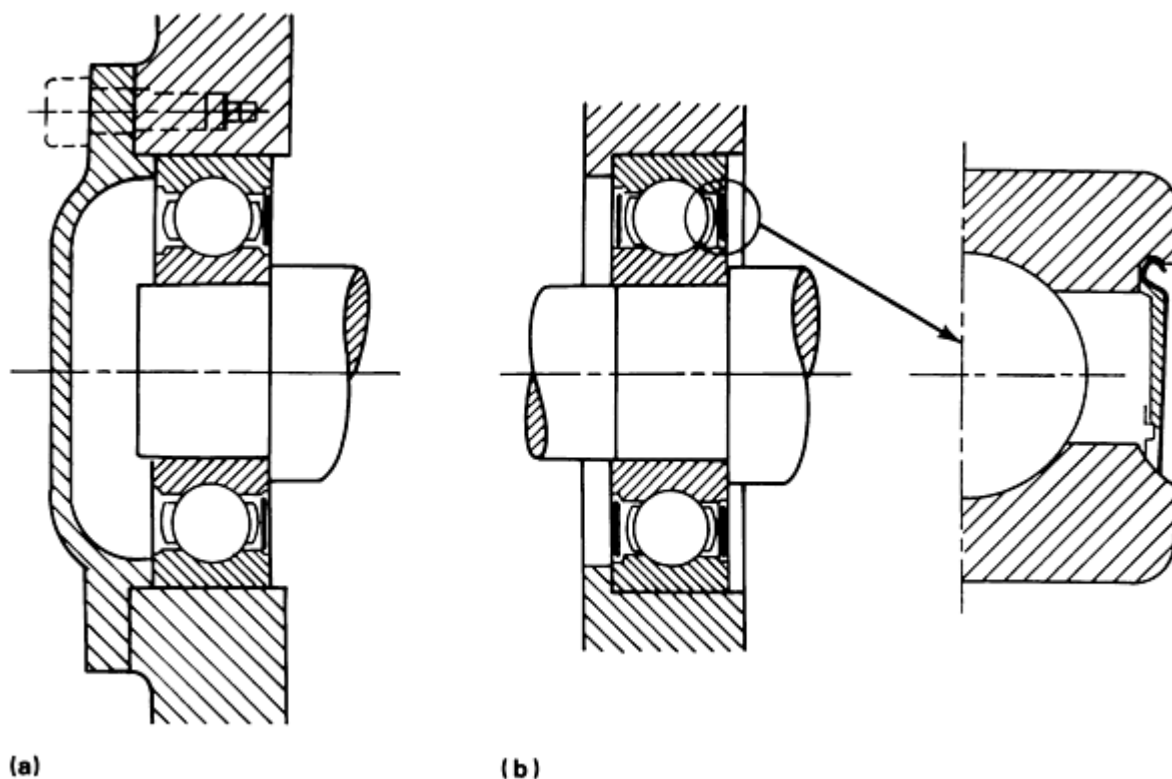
Location of elastomeric integral seals in a ball bearing. (a) Single-face seal. (b) Dual-face seal
